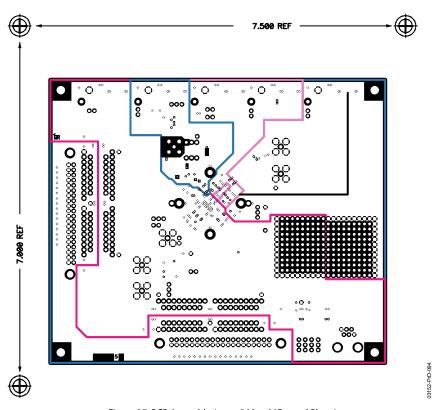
PCB Assembly, Layer 5 Metal (Ground Plane)
